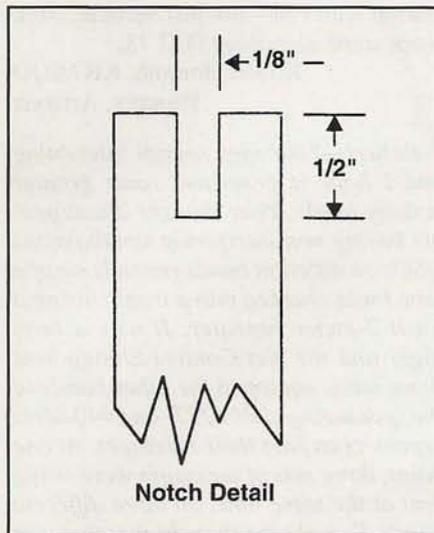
Detail of notch to be cut into one end of parts A, B, D, E, and G in Figure 1. These notches will hold the quad elements and the support cable in place.
